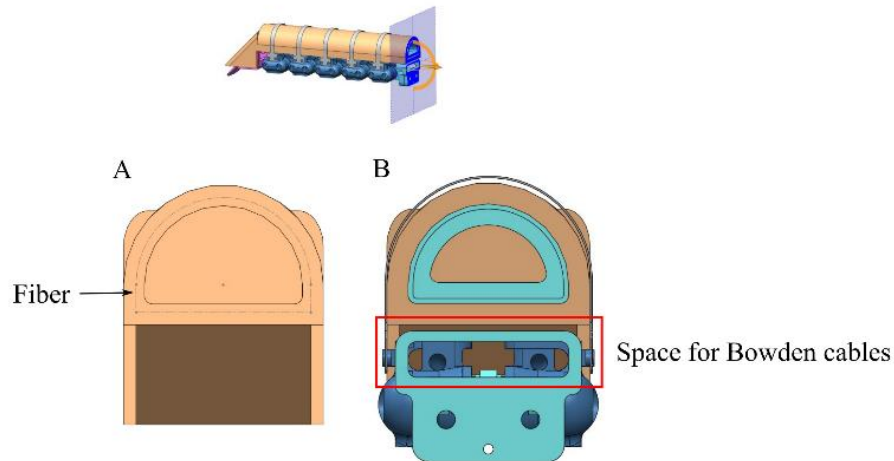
(A) The pneumatic actuator semicircular cavity view. (B) The cross-section view of the assembly finger shows the space under the pneumatic actuator for the Bowden cable sets.
